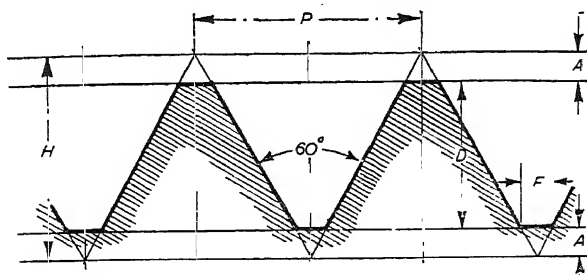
Sellers' or United States Standard Thread (U.S.S.).
